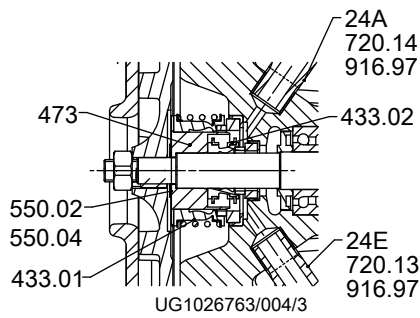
Model with double mechanical seal in tandem arrangement (SU 17)
